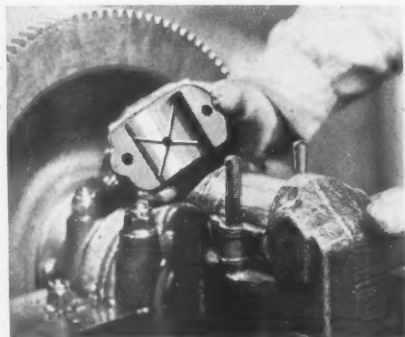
In Removing Connecting Rod Caps Hold Rod and Bolts as Shown and Keep Shims in Place
